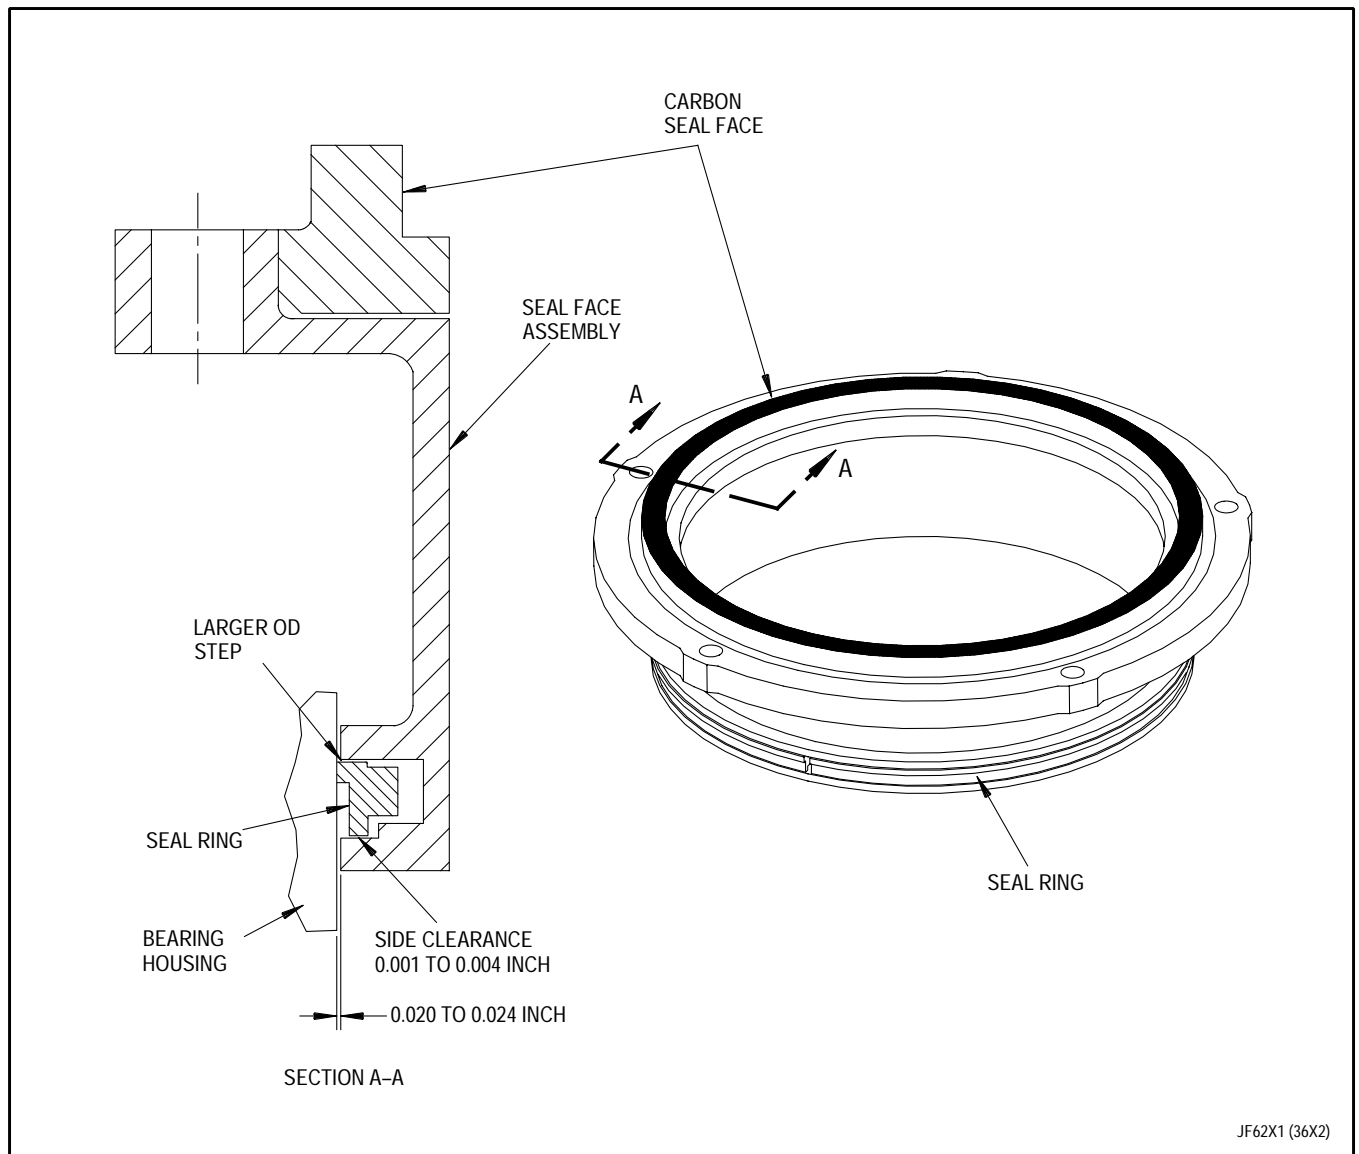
No. 1 Bearing Seal Face Assembly and Seal Ring - Seal Ring Dimensional Check
